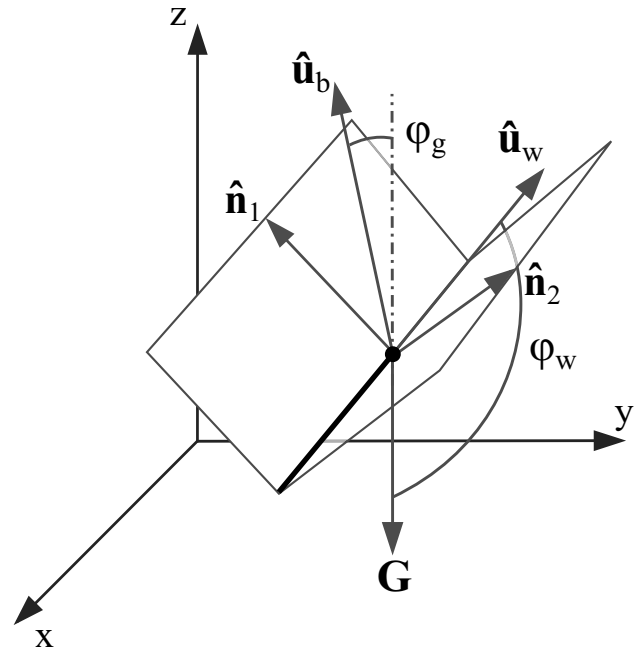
Vectors for defining welding positions and operations. Welding axis  $\hat{u}_w$ , and welding face  $\hat{u}_b$
